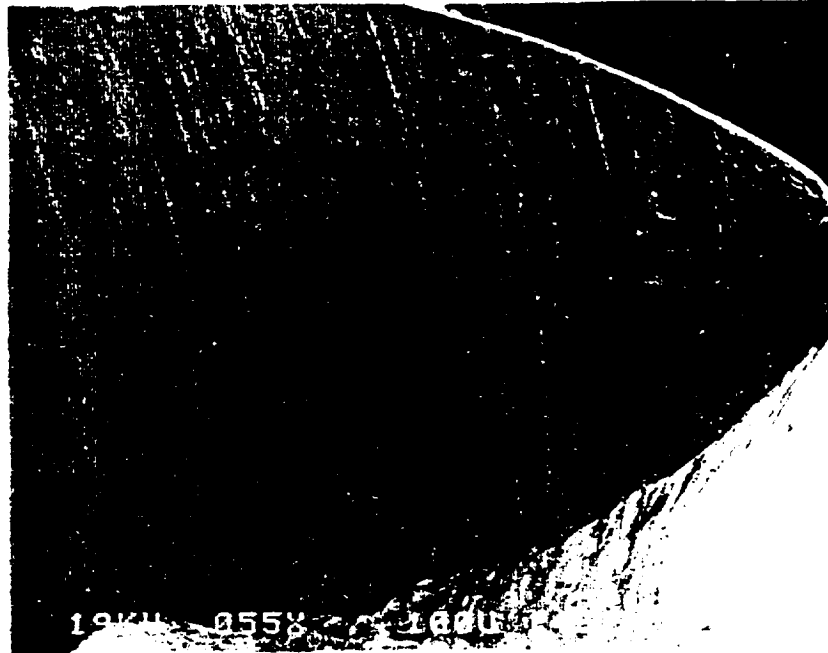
The bottom plate side of the 718 drive gear showing severe scoring and damage to the leading edge of the tooth.
